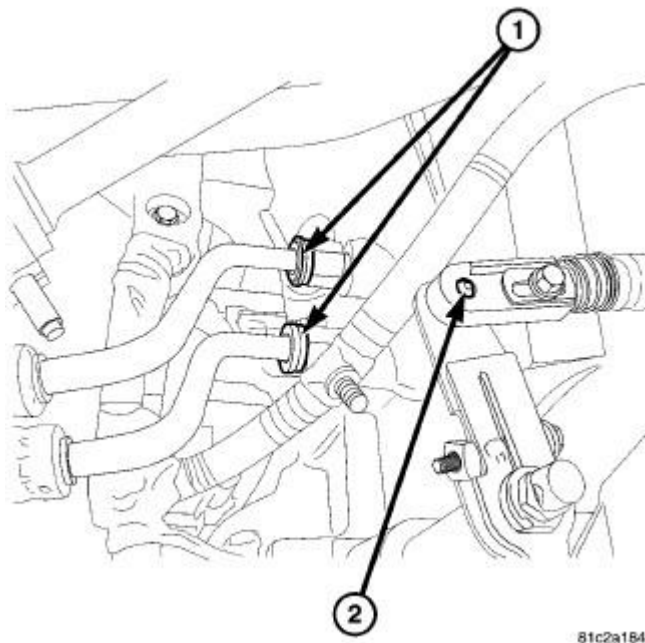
Transmission Cooler Lines & Transmission Shift Cable
